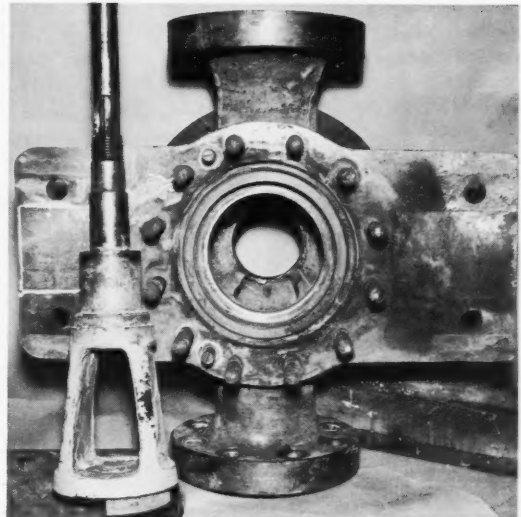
Condition of valve plug and body after 6075 hr of test operation at temperatures from 500 to 900°F.
